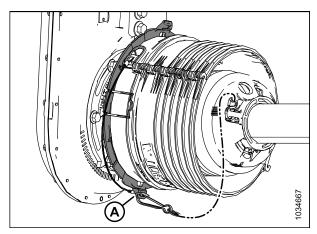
Chain Secured to Driveline on Float Module Gearbox
